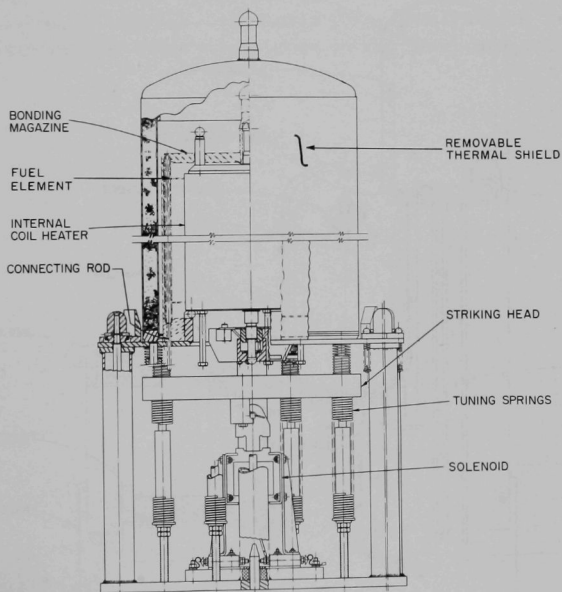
Fuel-element Sodium-bonding Machine for Remote-controlled Operation in EBR-II Fuel Cycle Facility.
